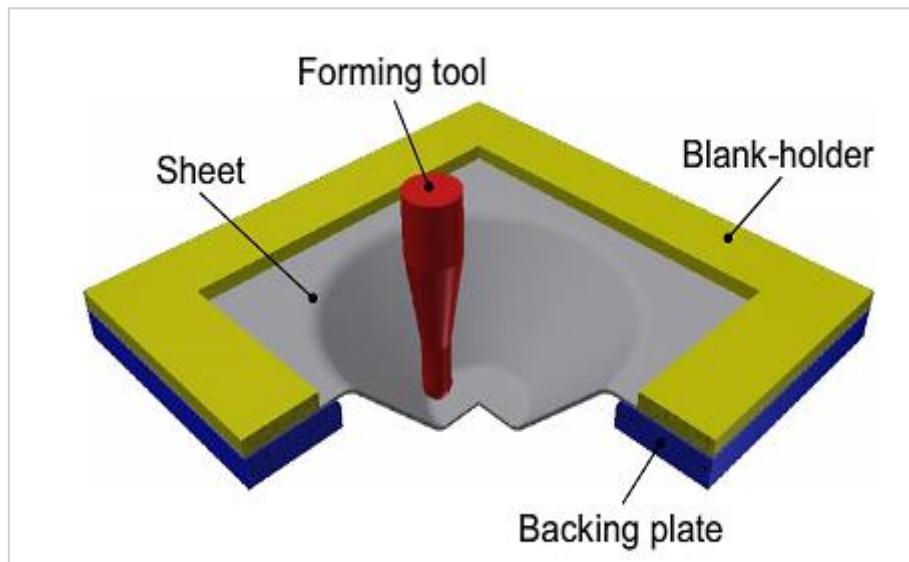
The main components of single point incremental forming are the forming tool, blank holder, backing plate, and sheet metal [5]
